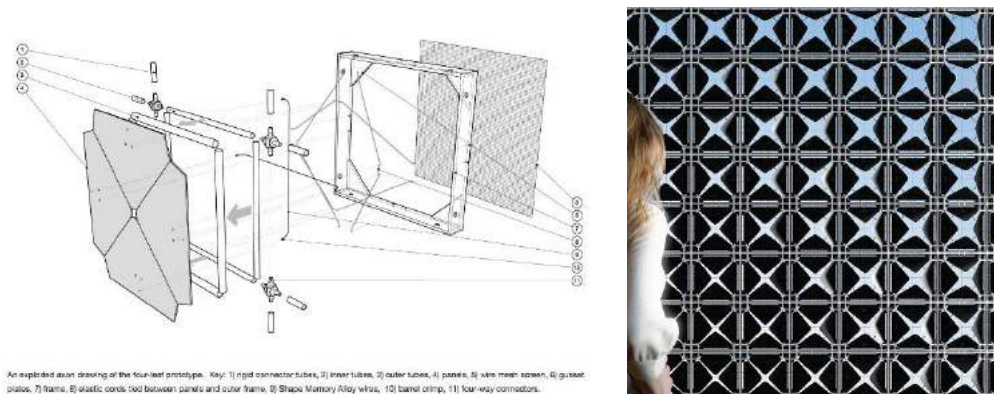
An exploded diagram of the four-leaf prototype assembly. Photograph of the possible module layout. Diagram and photo courtesy of Andrew Payne.
